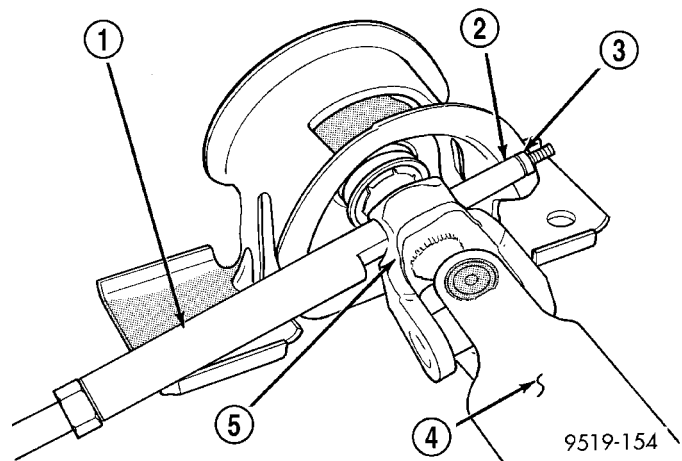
Tool Set-Up For Installing Roll Pin (Typical)
